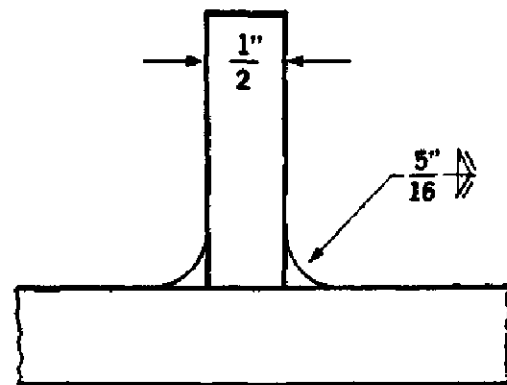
Fillet welding bridge girder stiffeners: joint design
